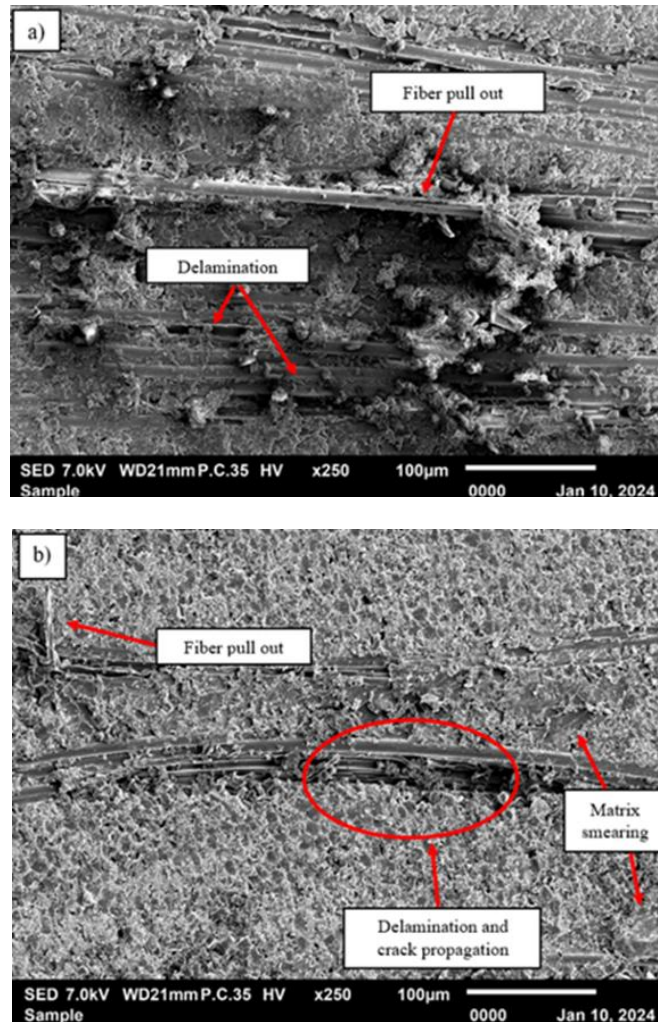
Defects observed under SEM microscope for CFRP machined with cutting speed of 100 m/min in (a) dry cutting condition (b) wet cutting condition.
